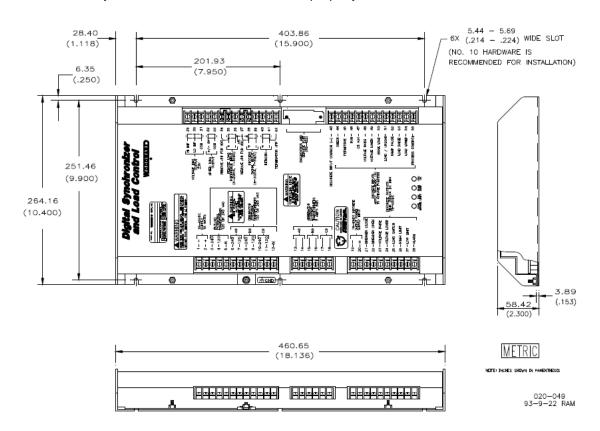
Mounting Hole Pattern and Dimensions of Original DSLC
